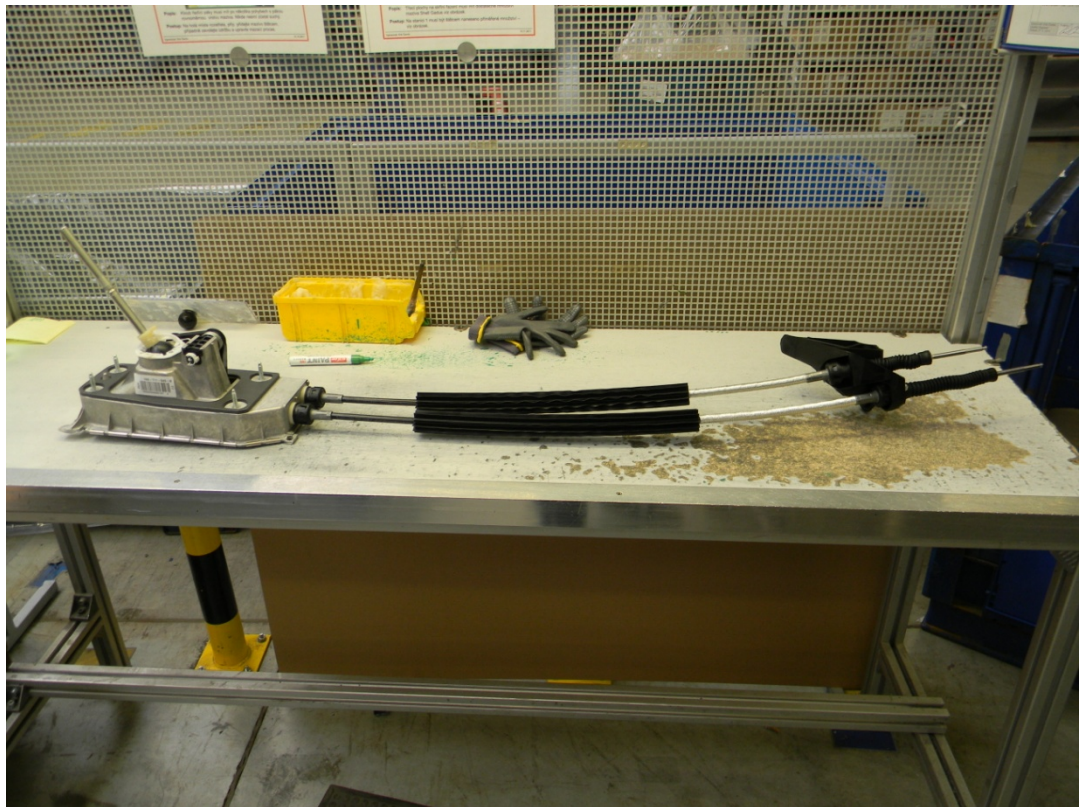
Final product, assembly shifter system for Volkswagen Up! car.
